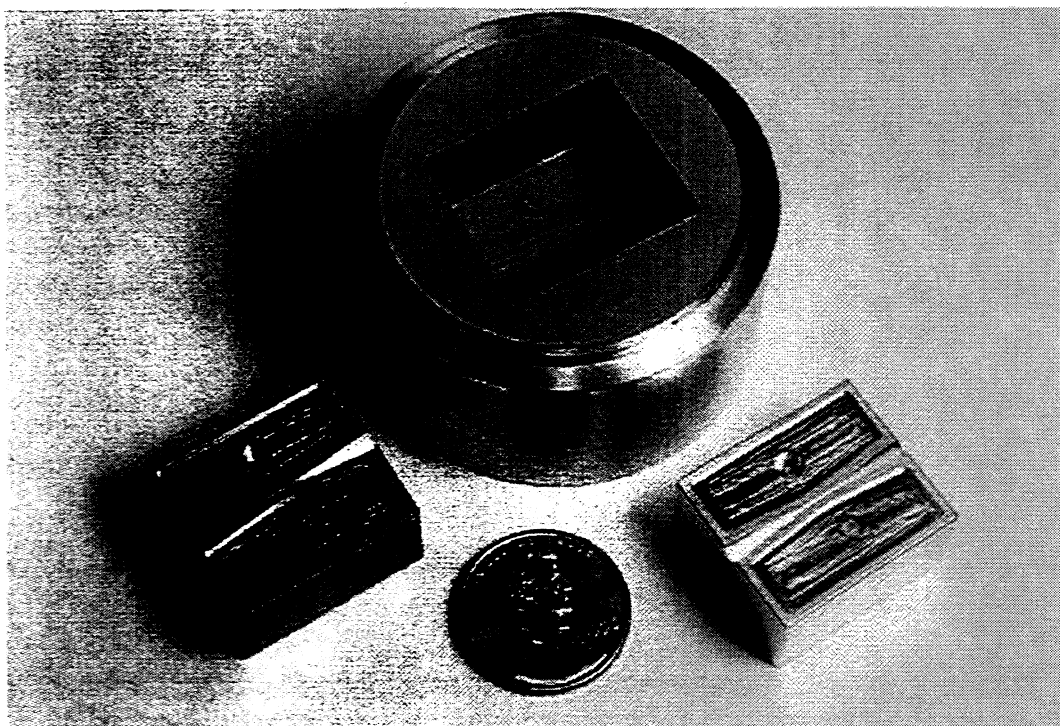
A photograph of a master (left), the silicone mold and a gold coated casting (right). The circuit is a 585 GHz waveguide and two diagonal horns.
